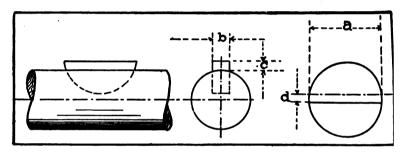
Diagram Showing Principal Dimensions of Woodruff Keys to Accompany Table of Sizes.
